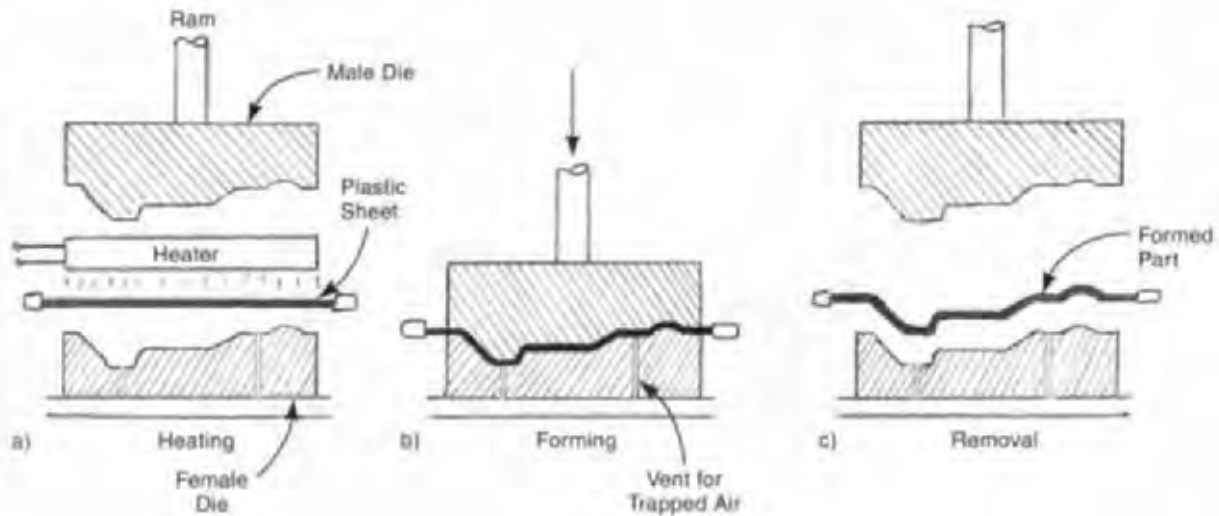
D7 Matched mold forming. a) The plastic sheet is placed between the die halves and heated. The heater is then retracted. b) The upper die descends, pressing the softened sheet between the die halves. The sheet cools and solidifies. c) The die opens and the formed sheet can be removed.
